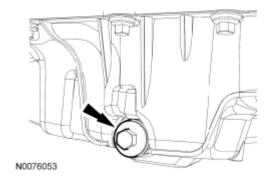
Locating Drain Plug Courtesy of FORD MOTOR CO.
